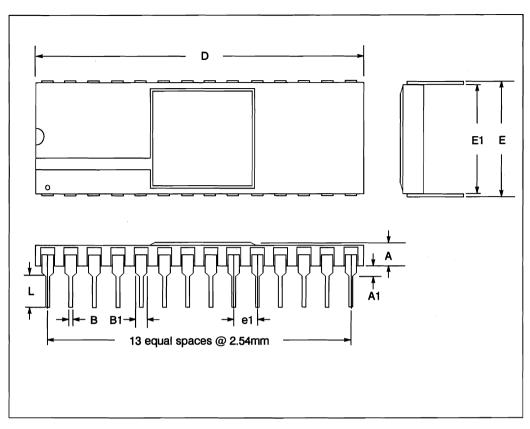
28 pin ceramic dual-in-line package dimensions
